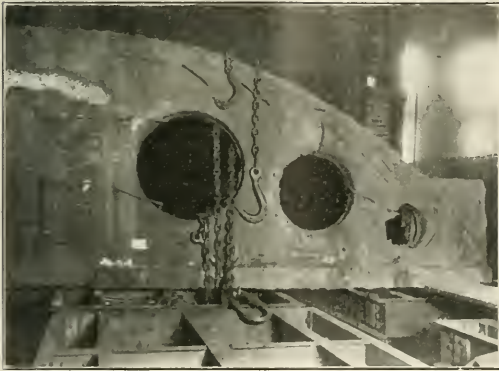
A Typical Iron Casting Welded by the Oxyacetylene Torch
